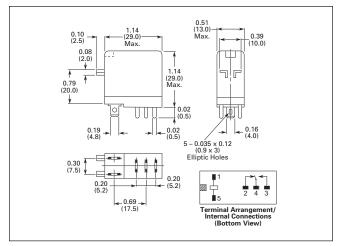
D4PR1 — Approximate Dimensions in Inches (mm)
